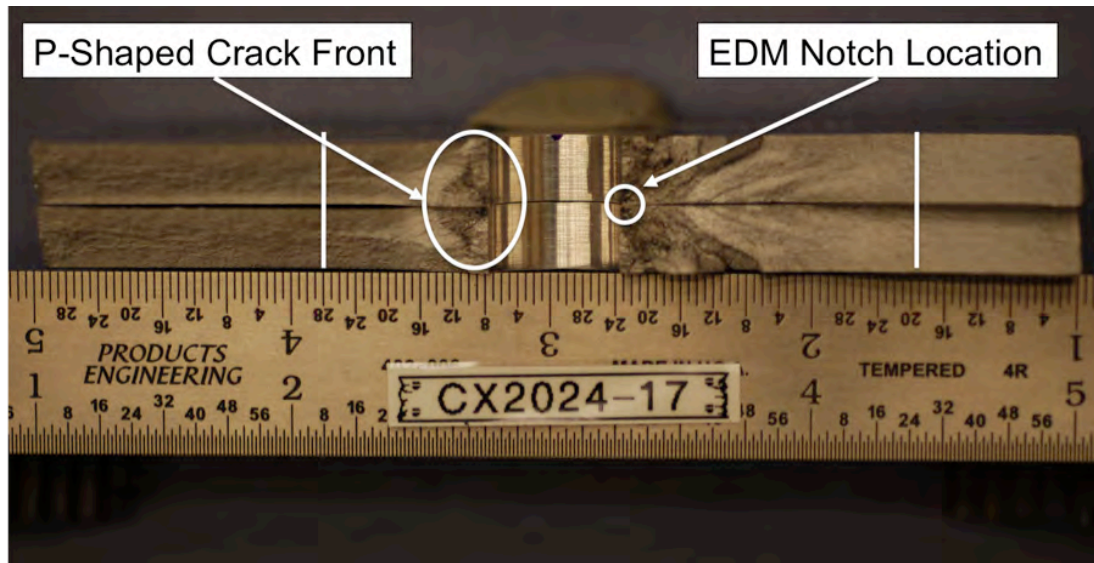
CX 2024-17, cold expanded specimen, pair fracture surface. Specimen was tested at a $\sigma_{\max} = 25$ ksi, $R = 0.1$, $f = 20$ Hz, and lab air. EDM notch is and fatigue zone are highlighted along with the P-shaped crack front typical in cold expanded holes.
